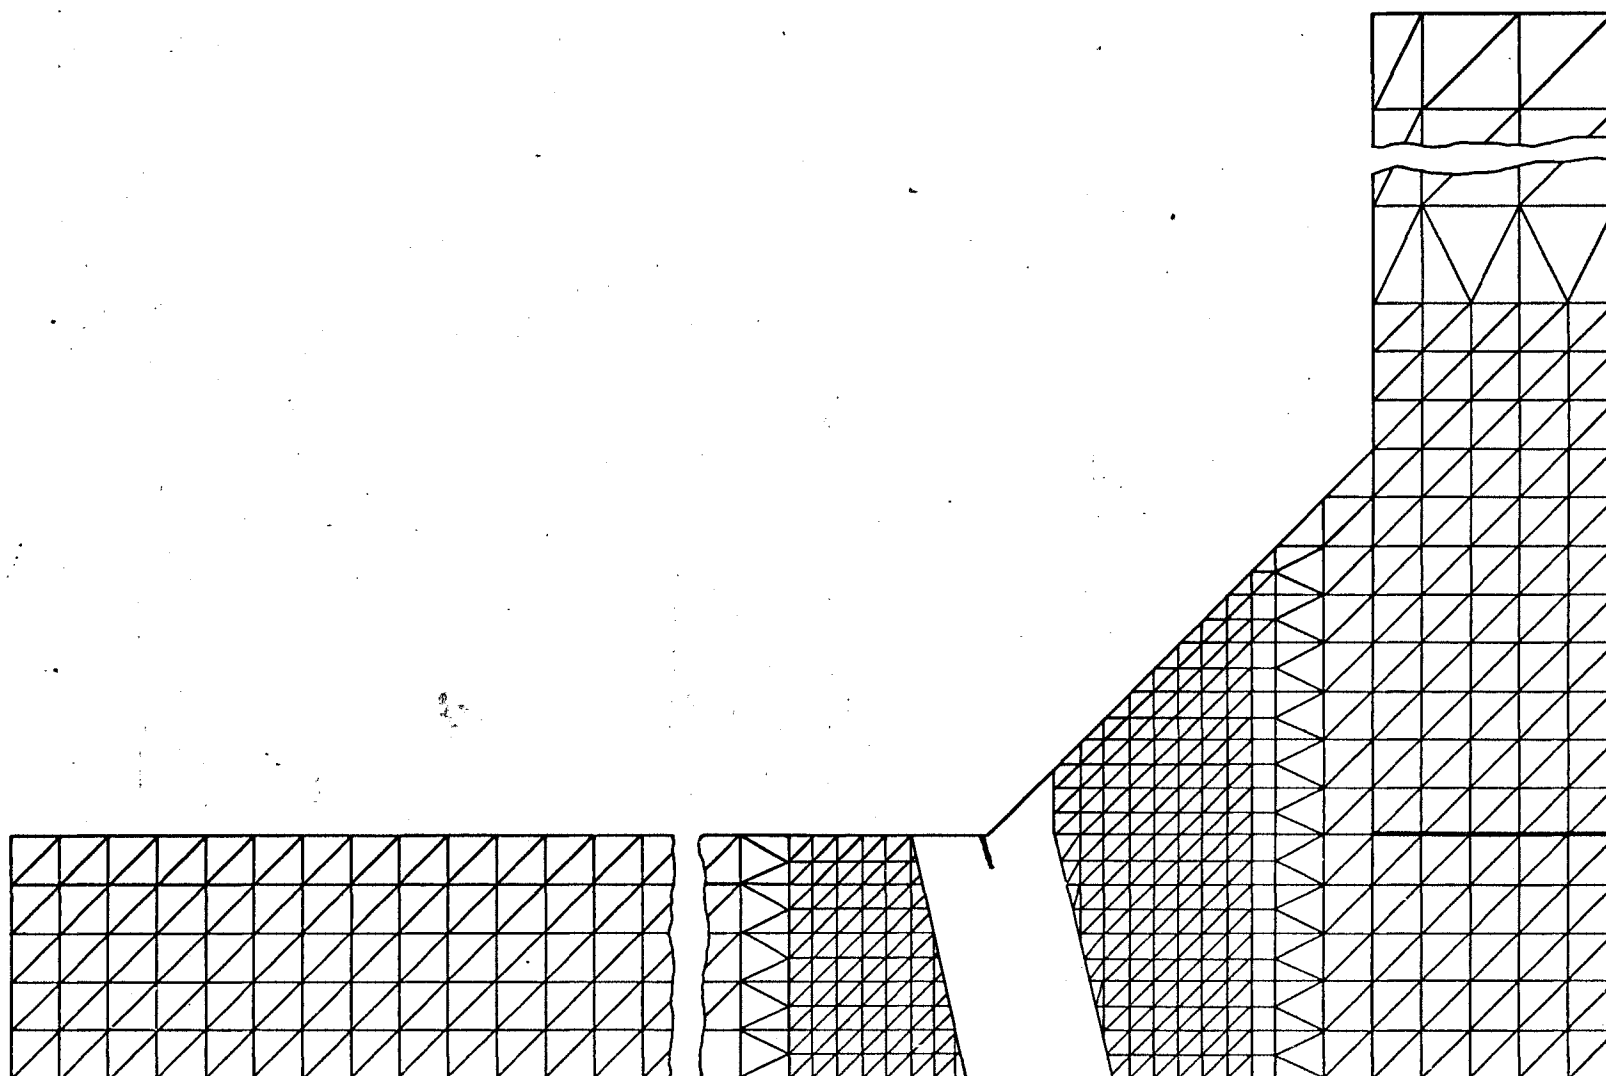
Non-Load Carrying Toe Crack Finite Element Mesh
